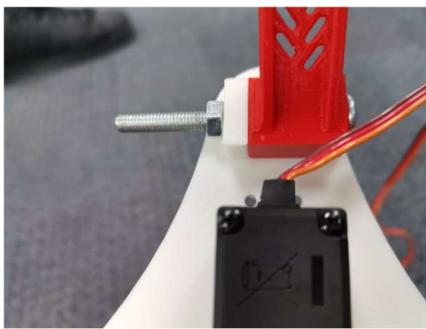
Bottom view photo of pod-servo mount joint assembly
